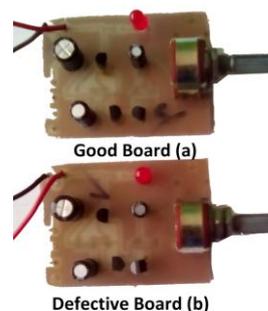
Board to diagnose: (a) Good Board, (b) Defective Board
